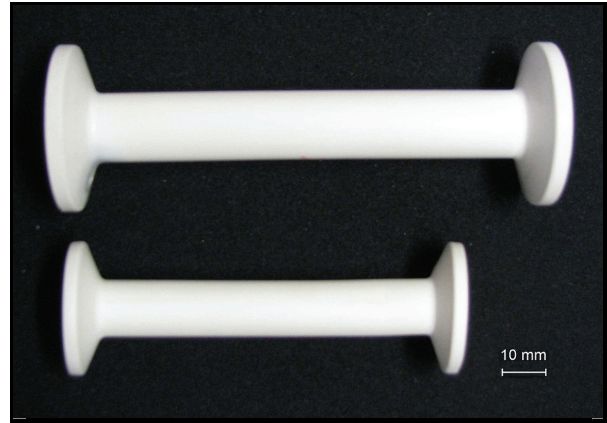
ceramic sensor housing – green part after injection molding (top), finished part subsequent to sintering (bottom)
